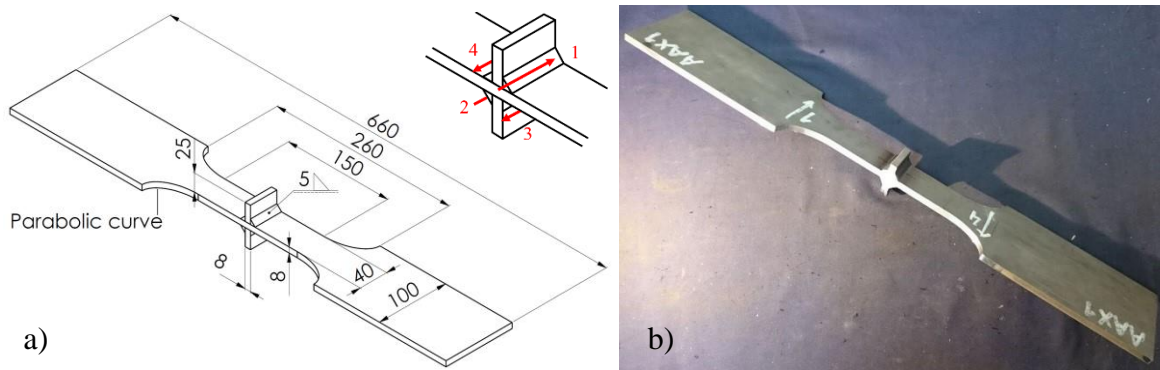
(a) Dimensions of X-joint test specimens and (b) a fabricated specimen. The red arrows signify the welding directions.
